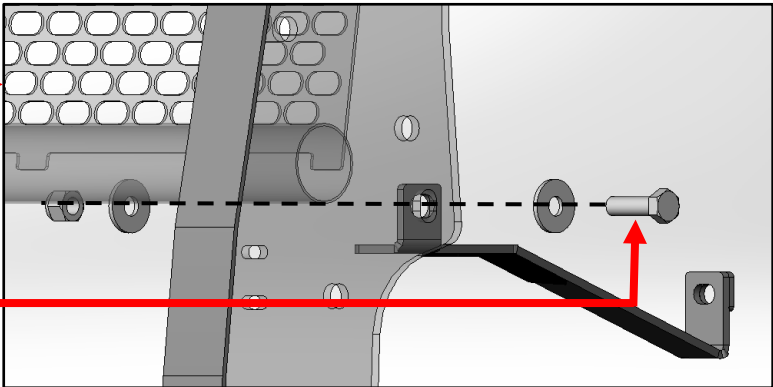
Mount the mounting brackets 2 to the DS & PS uprights
